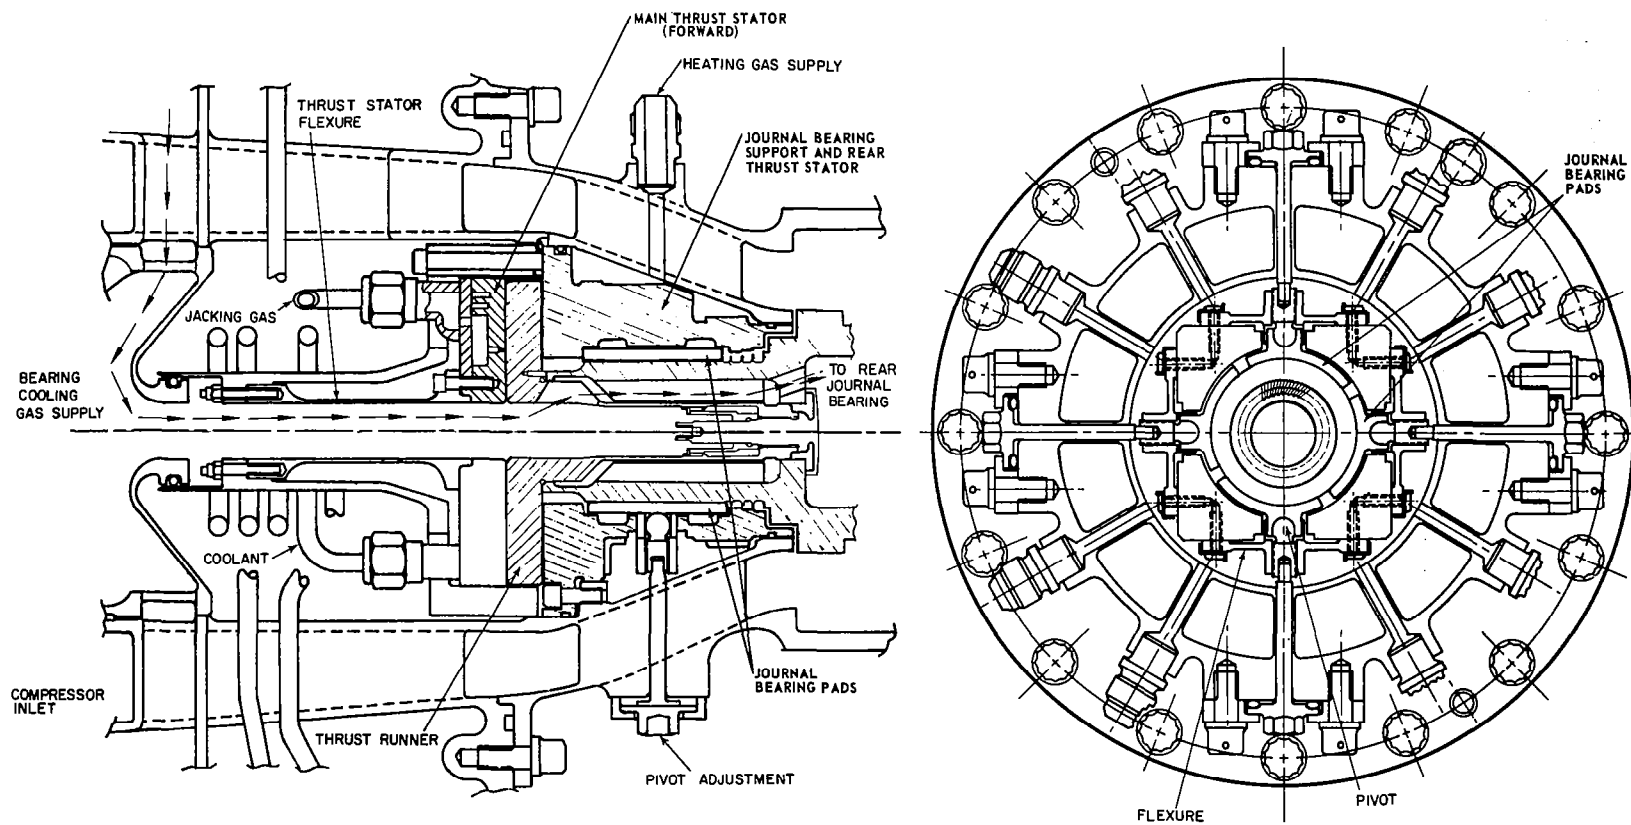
Turbine-Compressor Gas Bearing Design. Thrust Bearing and No. 1 Journal Bearing
